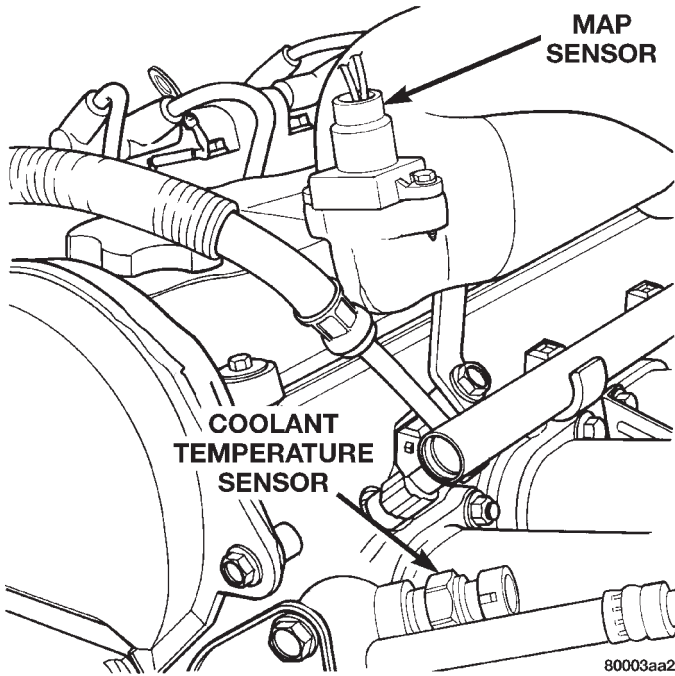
Engine Coolant Temperature Sensor—2.4L
